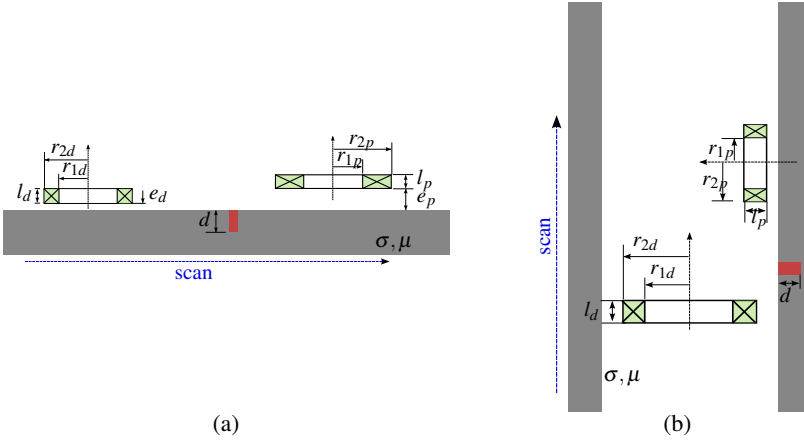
Electromagnetic inspection of (a) planar piece, (b) tube, in driver-pickup mode. One can distinguish the piece, the driver (d) and pick-up (p) coils and the defect (in red). The eddy-current head comprising the coils is scanning the piece along the dashed line.
